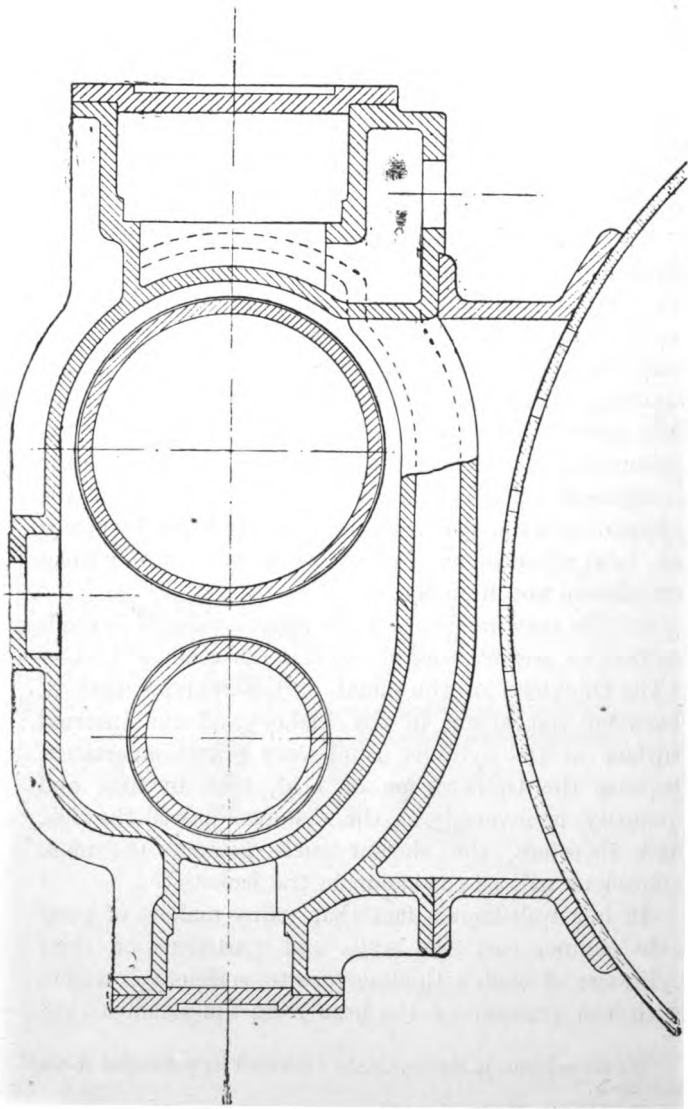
Compound portable engine cylinder from Haeder & Powles on *The Steam-Engine*.
